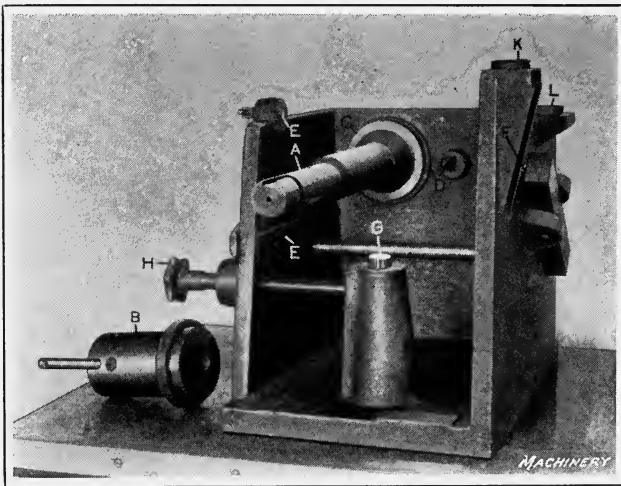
Another Fixture provided for a Milling Operation on a Profiling Machine
